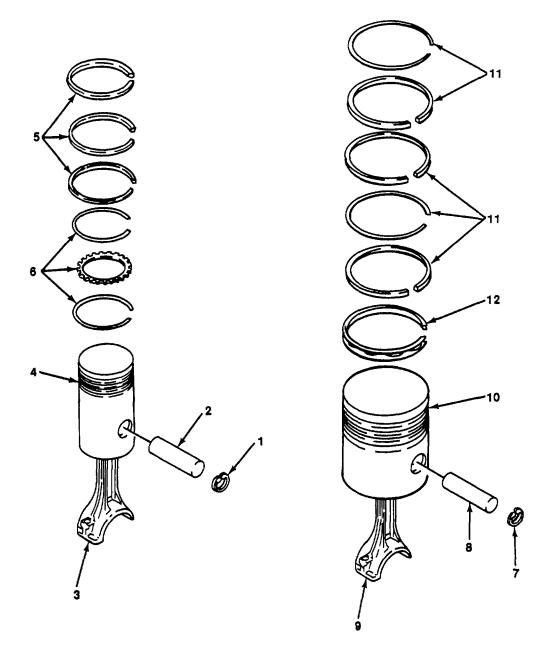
Compressor Pistons, Connecting Rods, Repair.
